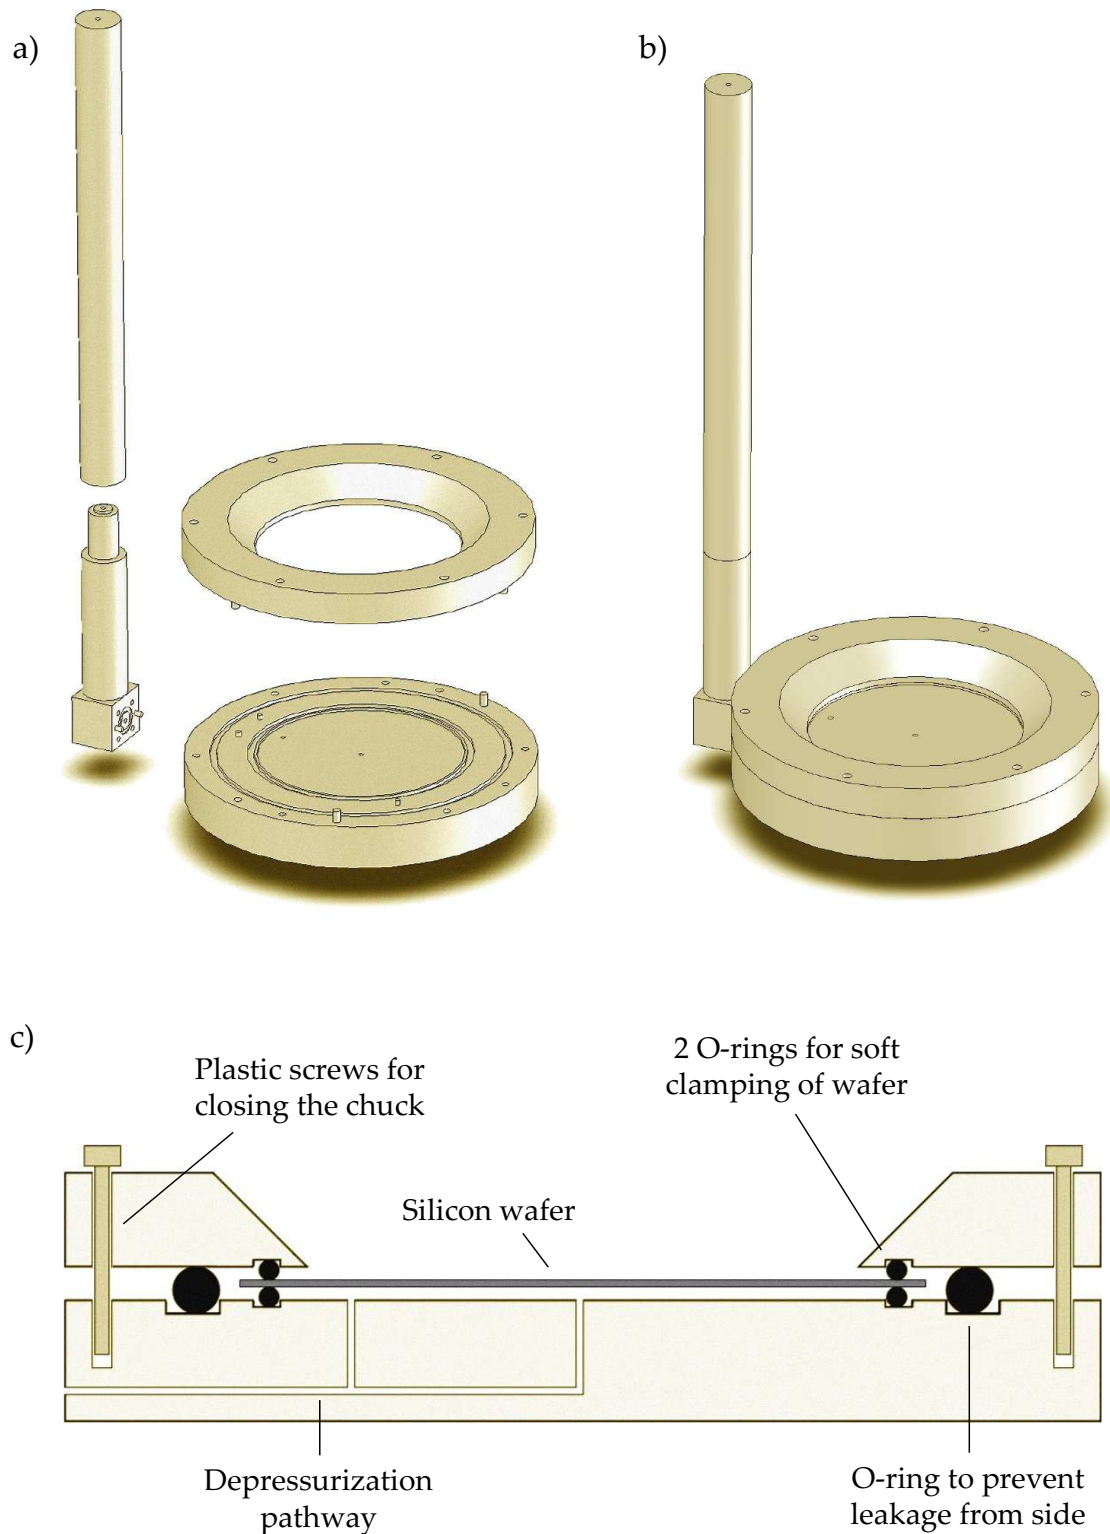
a) 3D view of the TMAH/KOH chuck with the four main parts separated. b) 3D view of the TMAH/KOH chuck after assembling the parts. c) Cross-sectional side-view of the two lower parts of the TMAH/KOH chuck.
